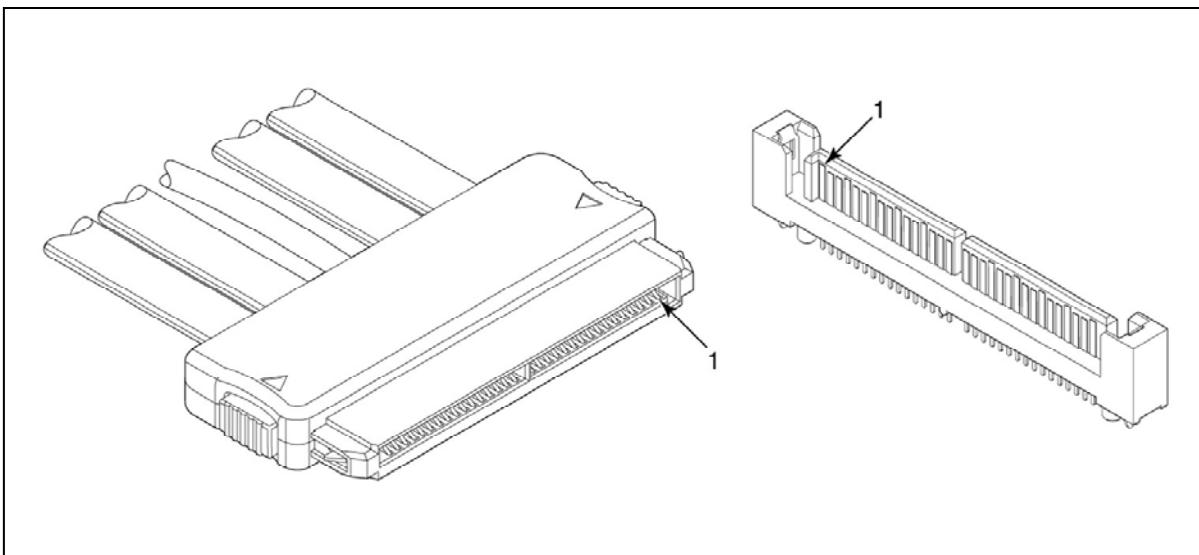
Isometric drawings of the internal 4 lane cable and connector
